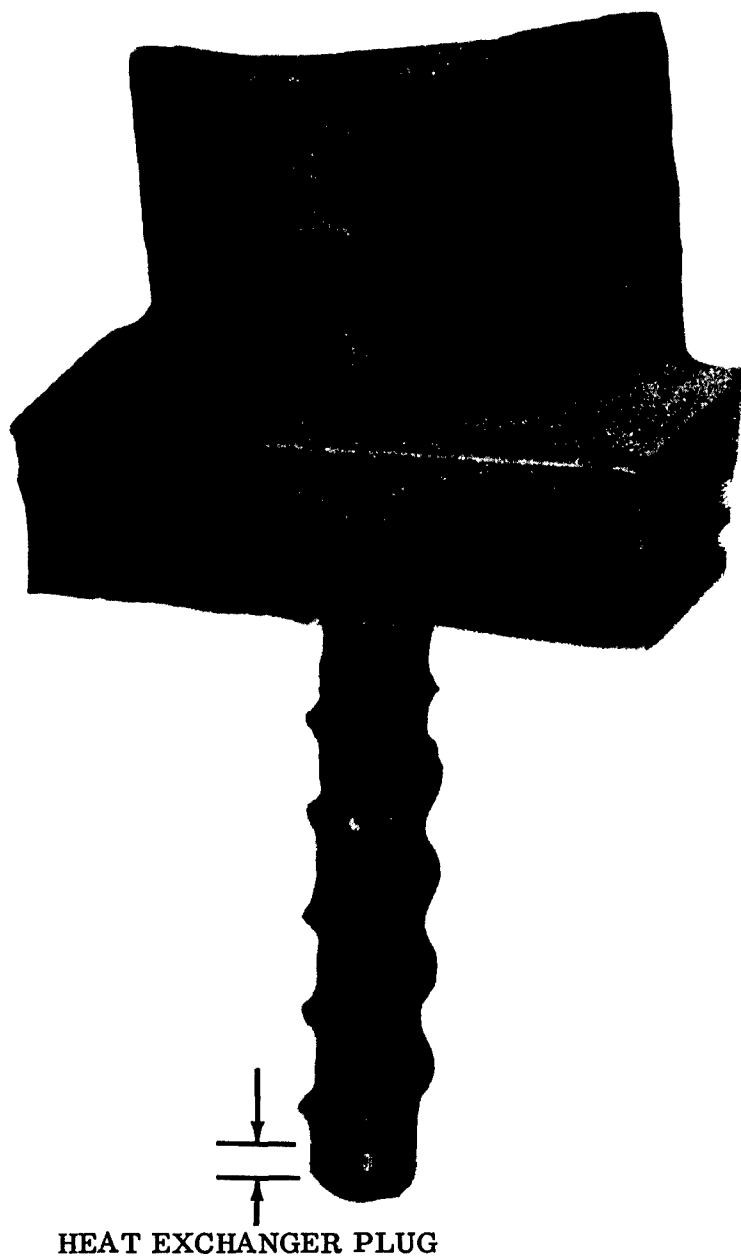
Electron Beam Welded Heat Exchanger Plug.
